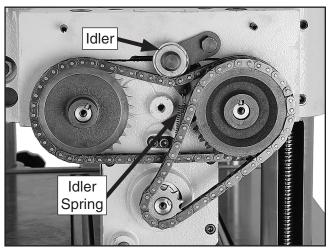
Location of sprocket and chain components (hex bolts and washers removed).
